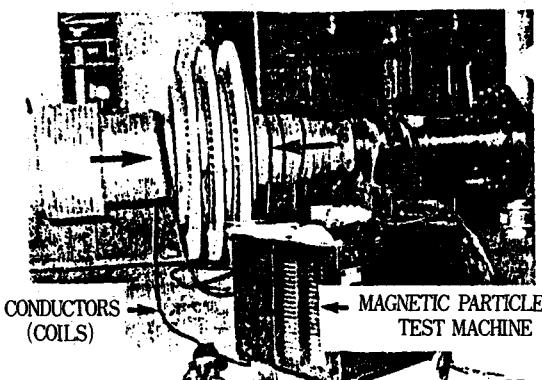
Bucking field method of magnetic particle testing of turbine blade.
